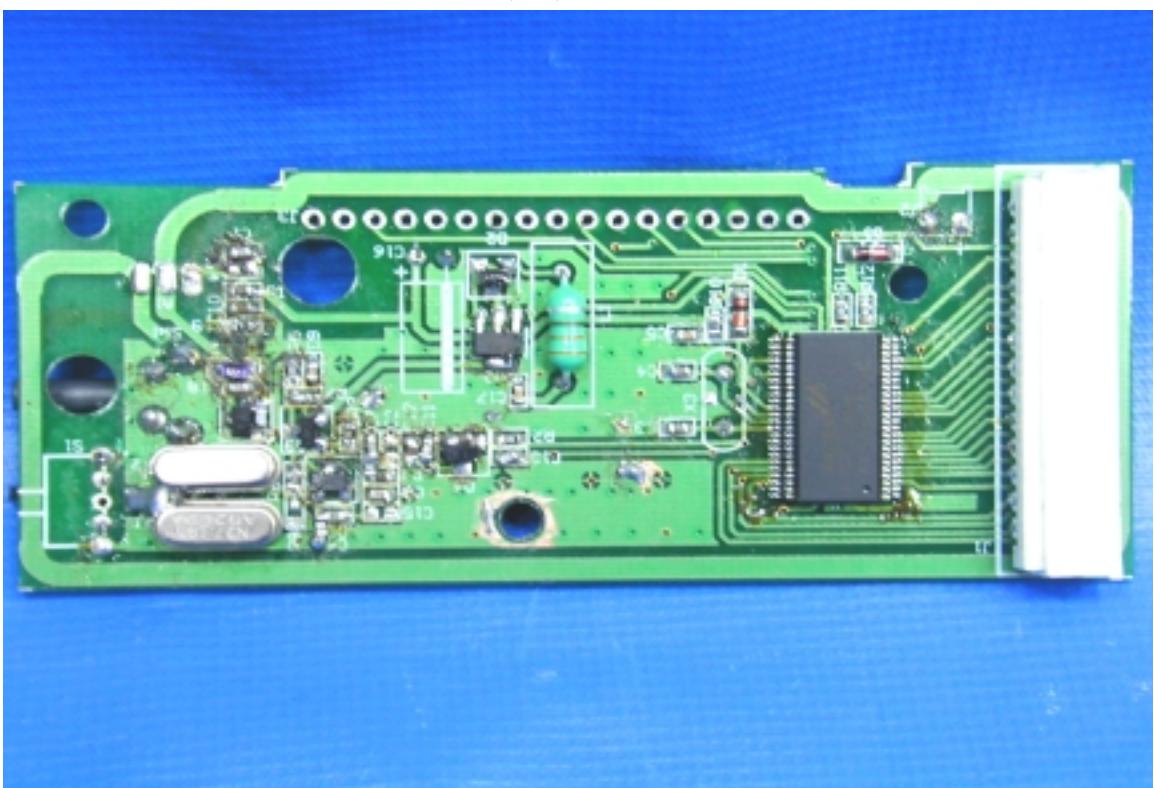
EUT (TX) SOLDERING SIDE VIEW
